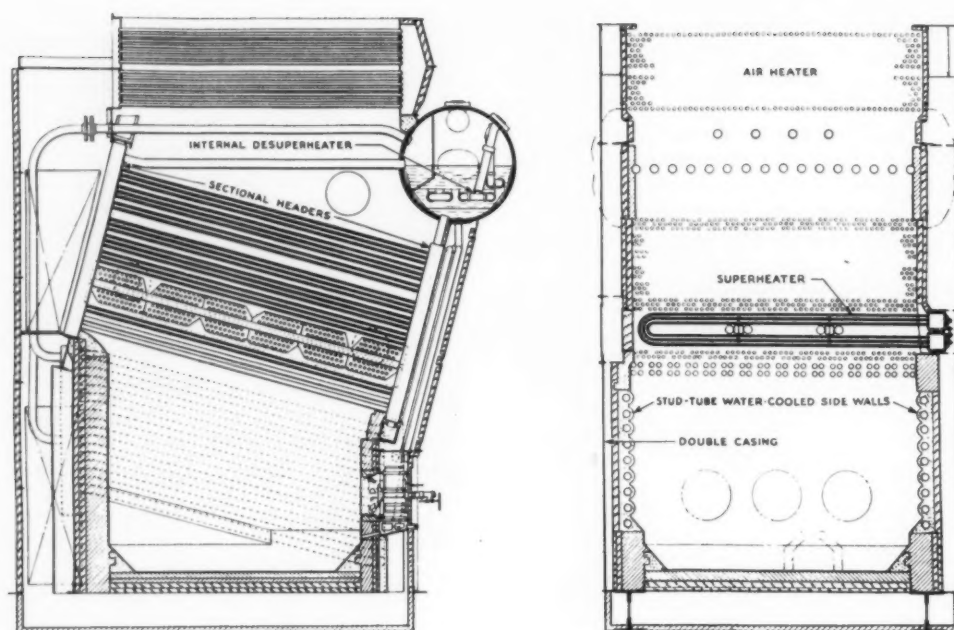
LONGITUDINAL AND FRONT-VIEW SECTIONS OF $1\frac{1}{4}$ -IN-TUBE SINGLE-PASS HEADER-TYPE BOILER WITH INTERDECK SUPERHEATER AND AIR HEATER
